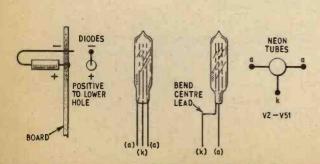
Mounting details of diodes and cold cathode tubes on Board I. Resistors and capacitors are mounted similarly to the diodes
